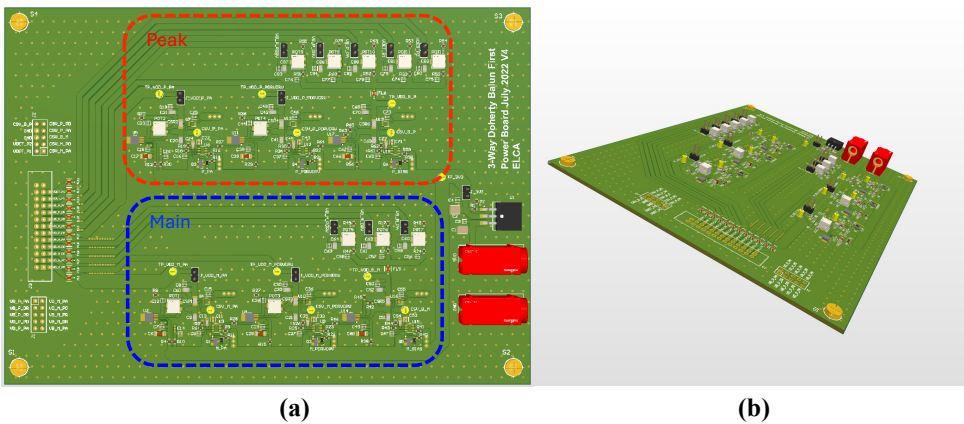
(a) Top view, and (b) isometric view of the power board PCB for the balun first 3-way Doherty PA.
